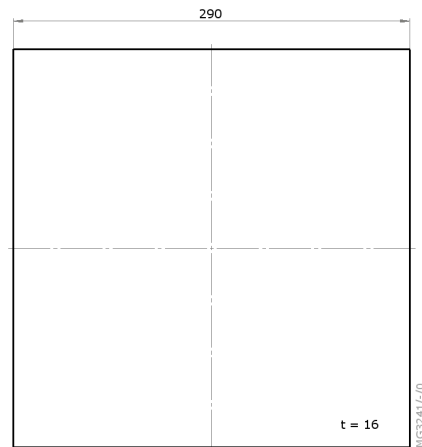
Steel plinth - flange plate A (square): top view (dimensions in mm)
